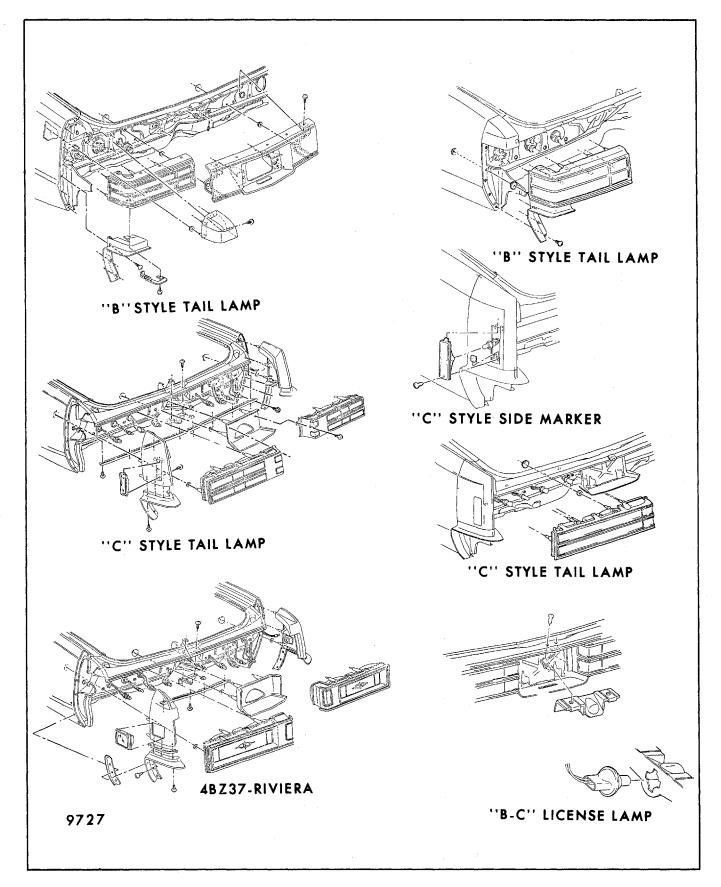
Exterior Lamp Installation - Buick Styles
